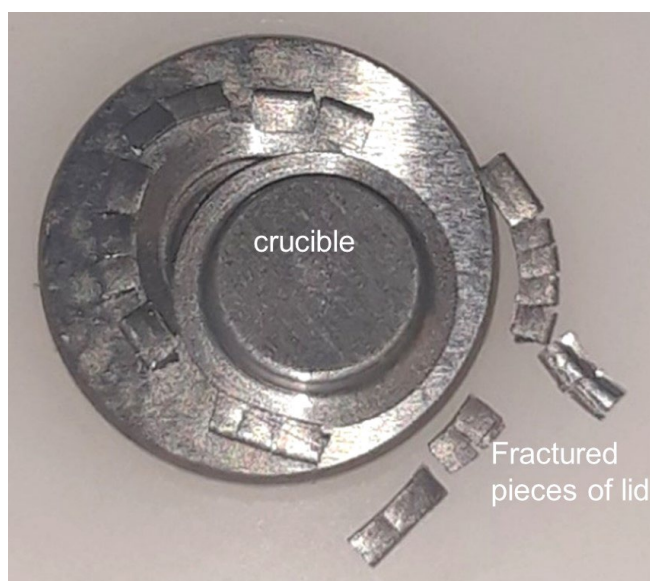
Photograph of 5-mil molybdenum crucible and lid that fractured during sealing.
